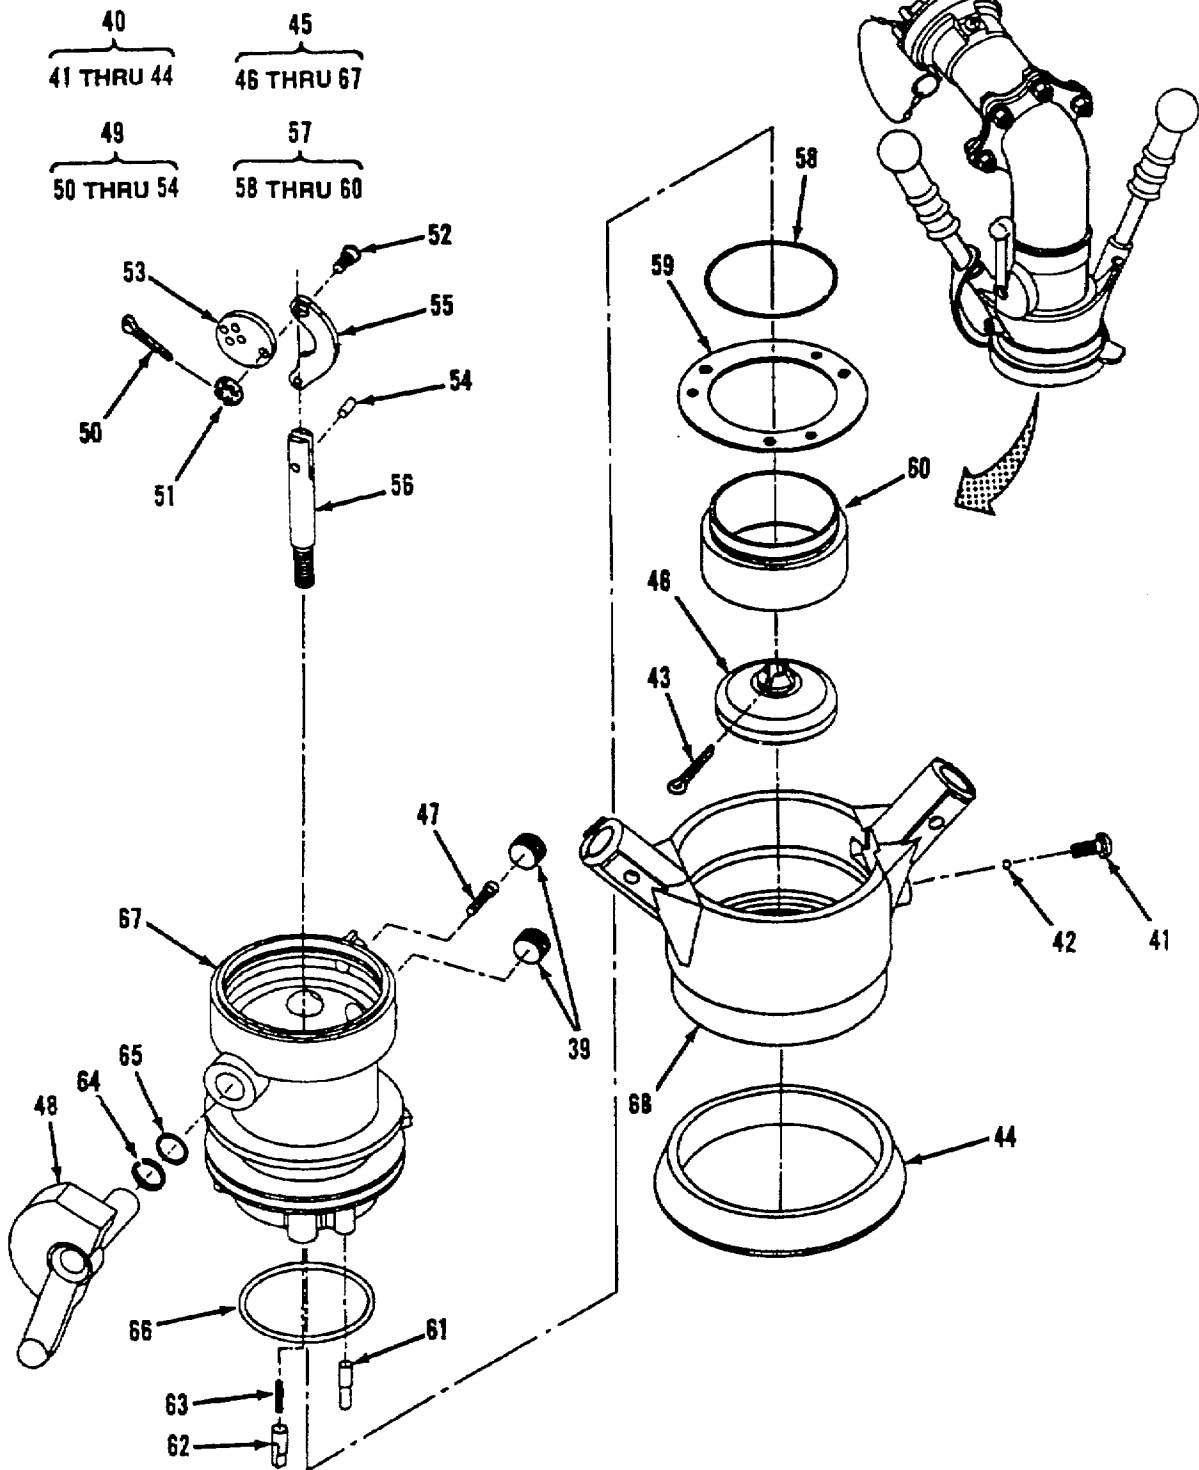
Pressure Fueling Nozzle Assembly (HTARS100) (Sheet 4 of 4)
